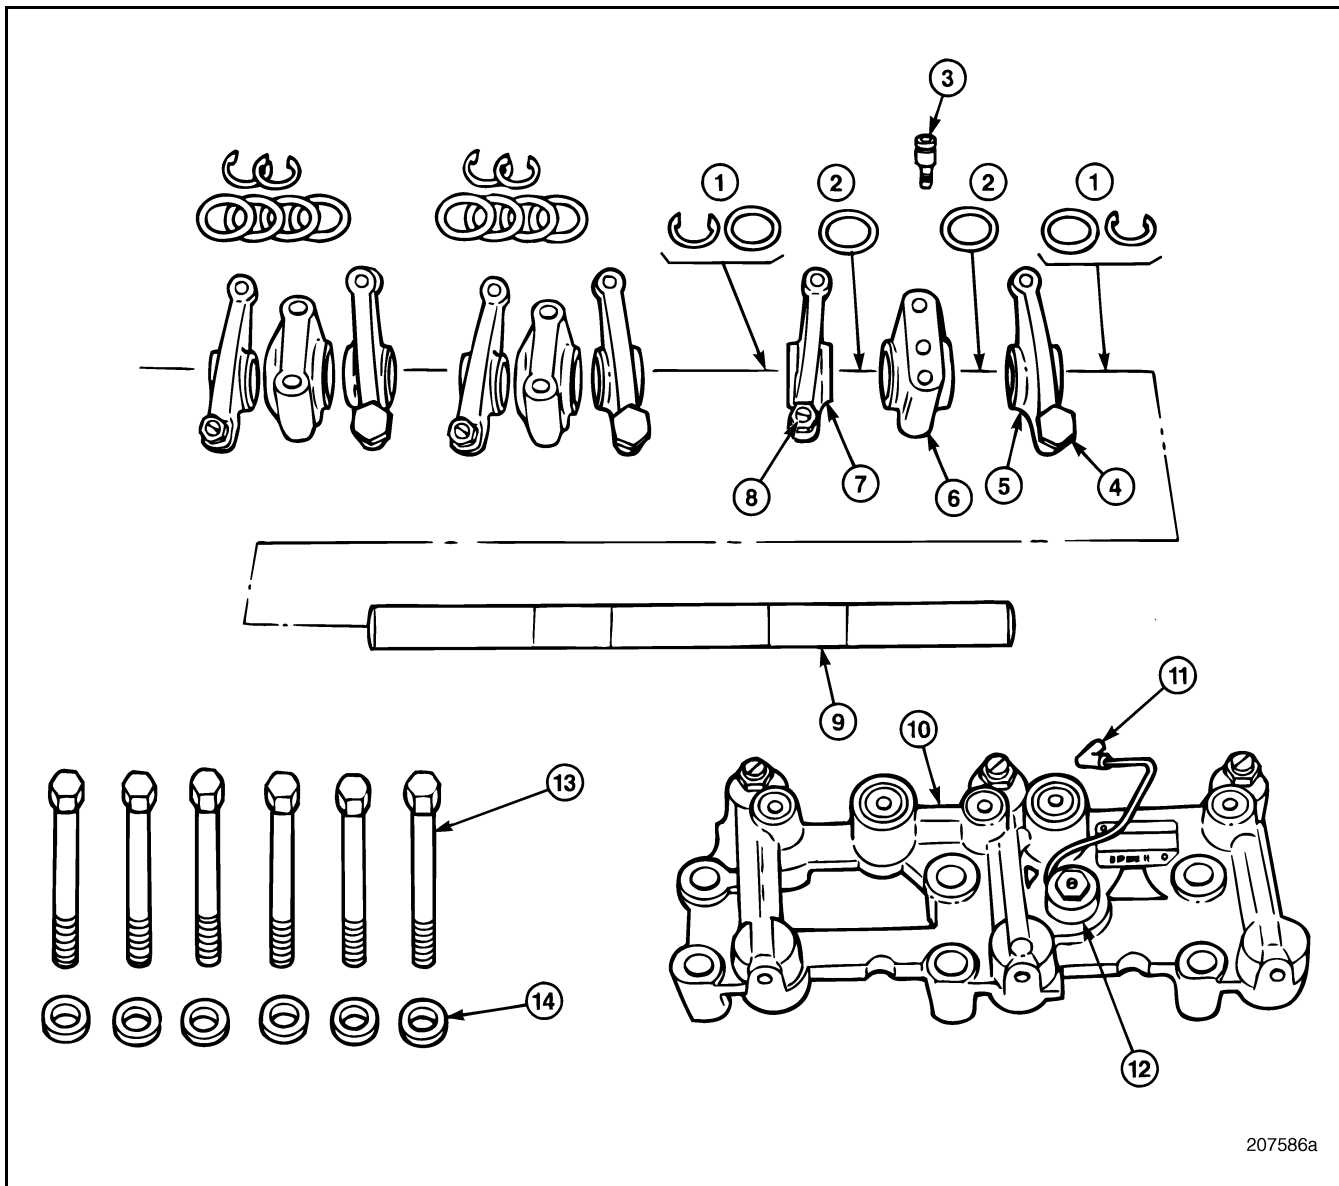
Valve Rocker Arm Shaft Assembly (with J-Tech™ Engine Brake)
